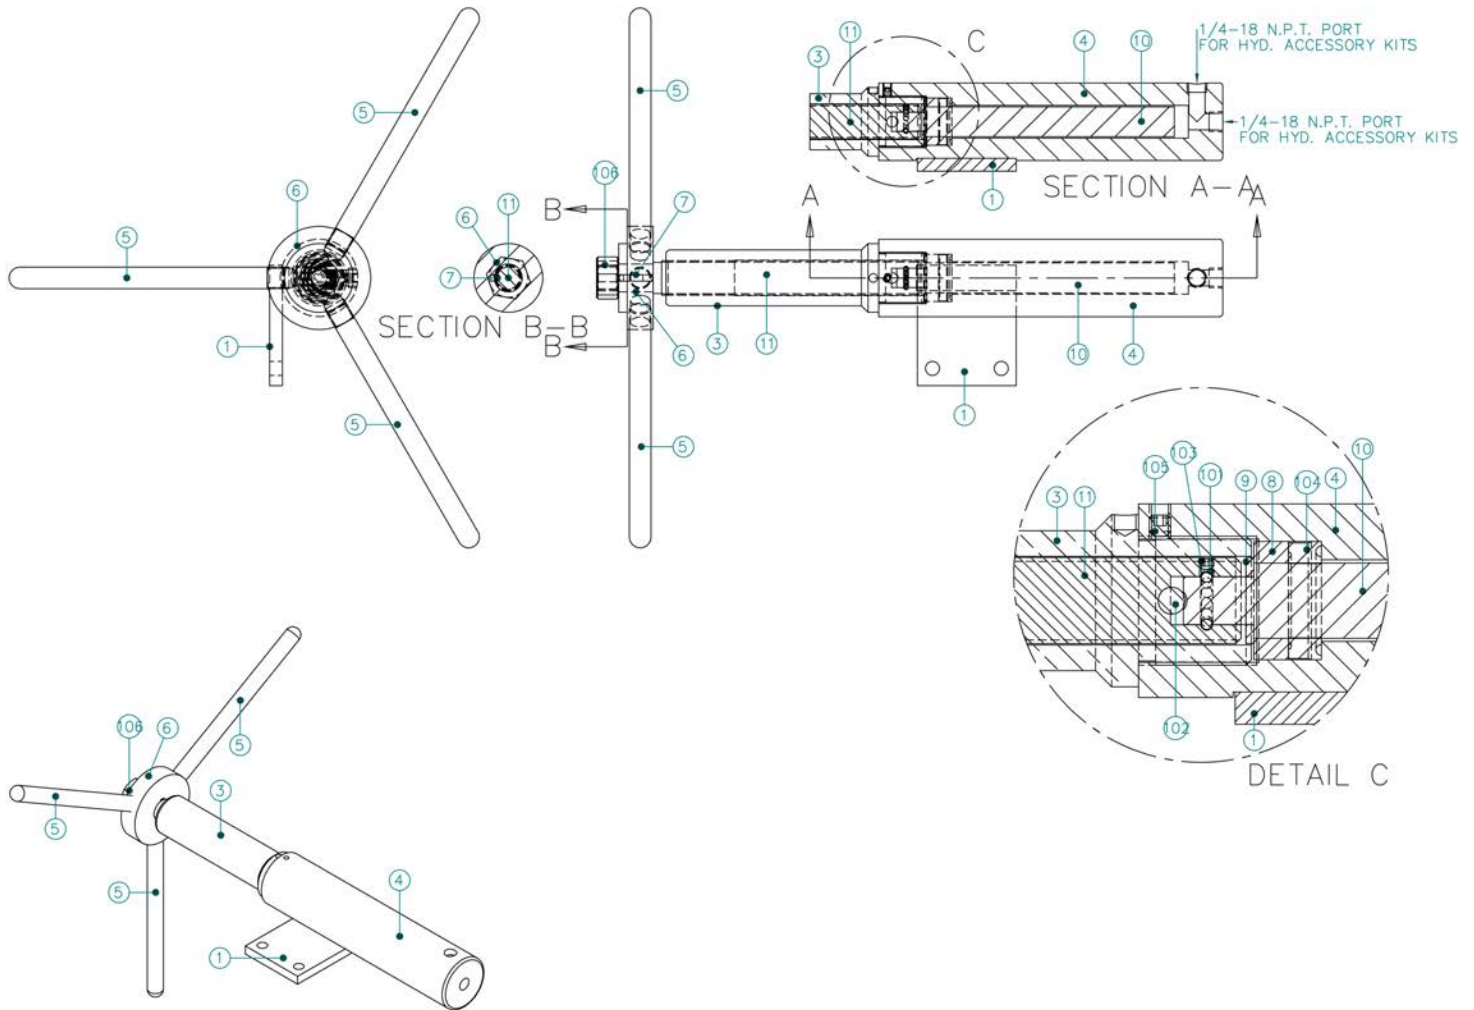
Full Unit Assembly for Morehouse Hydraulic Screw Pump (Drawing 806000-02)
